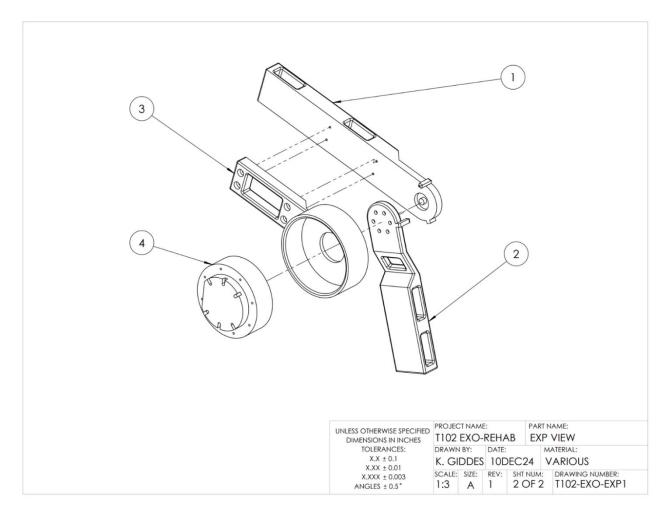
Technical drawing of the motor housing. The motor housing connects the thigh part (1) and the shank part (2). The motor (4) is placed in the exoskeleton (3) to serve as the actuator for the mechanical movements. Made with SolidWorks.
